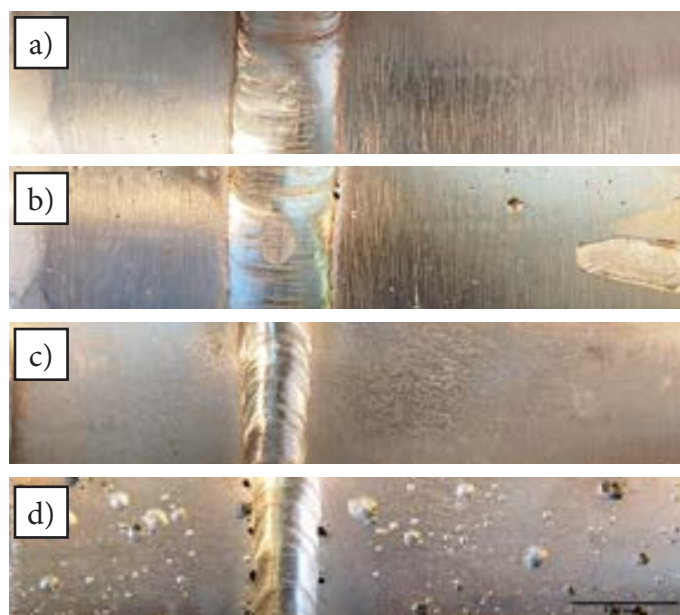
Specimen no. 3, where temper colours were removed mechanically: a) weld face before the corrosion resistance test, b) weld face after the corrosion resistance test, c) weld root before the corrosion resistance test, d) weld root after the corrosion resistance test
